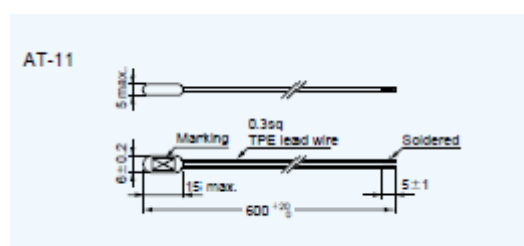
Size and dimensions in mm of thermocouple 103AT-11 [3]
